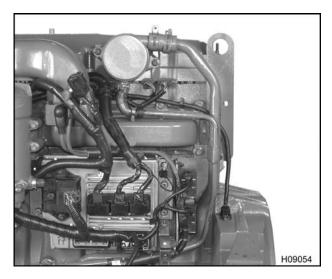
ECM, IDM, EGR drive module, and tube assembly overview
